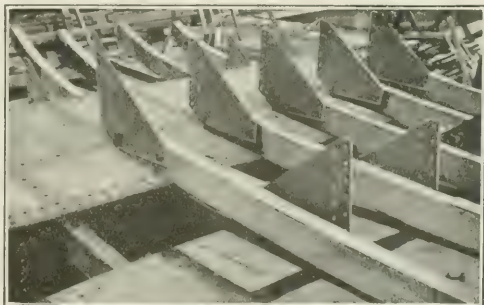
FRAMES BOLTED TO SHEER-STRAKE—PRE-ASSEMBLED UNITS STORED IN CRANEWAY
